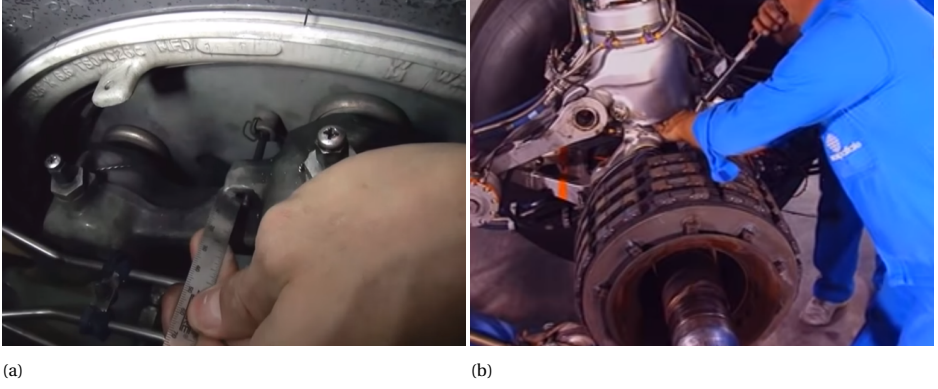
(a) Landing gear brake inspection. (b) Landing gear brake replacement.
